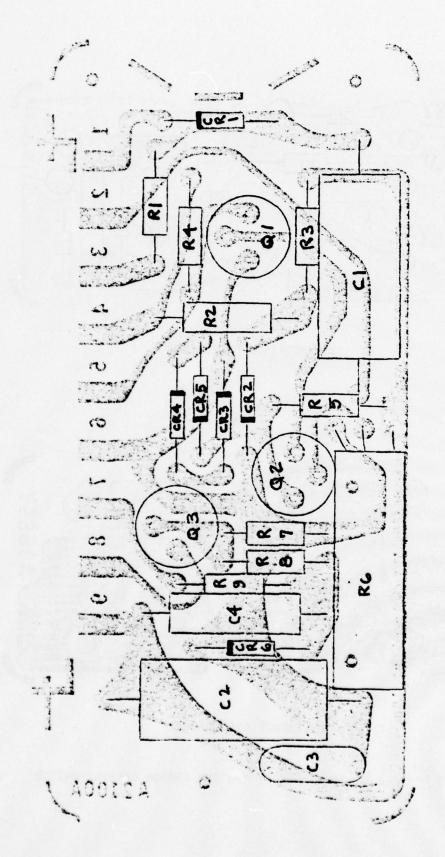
P.C. BOARD LAYOUT FOR THE A2100A VOLTAGE REGULATOR ASSEMBLY
